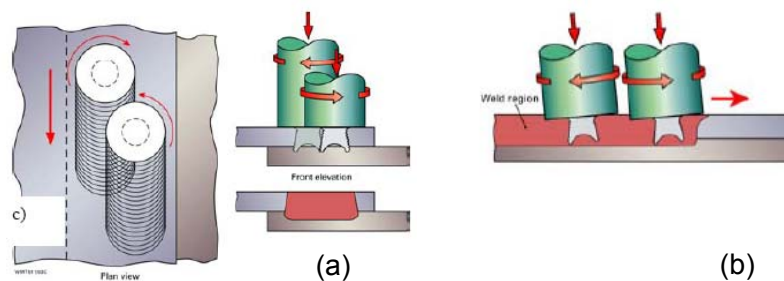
Schematic principle of Twin-stirTM-process (a), cross view (b) in welding direction [16]
